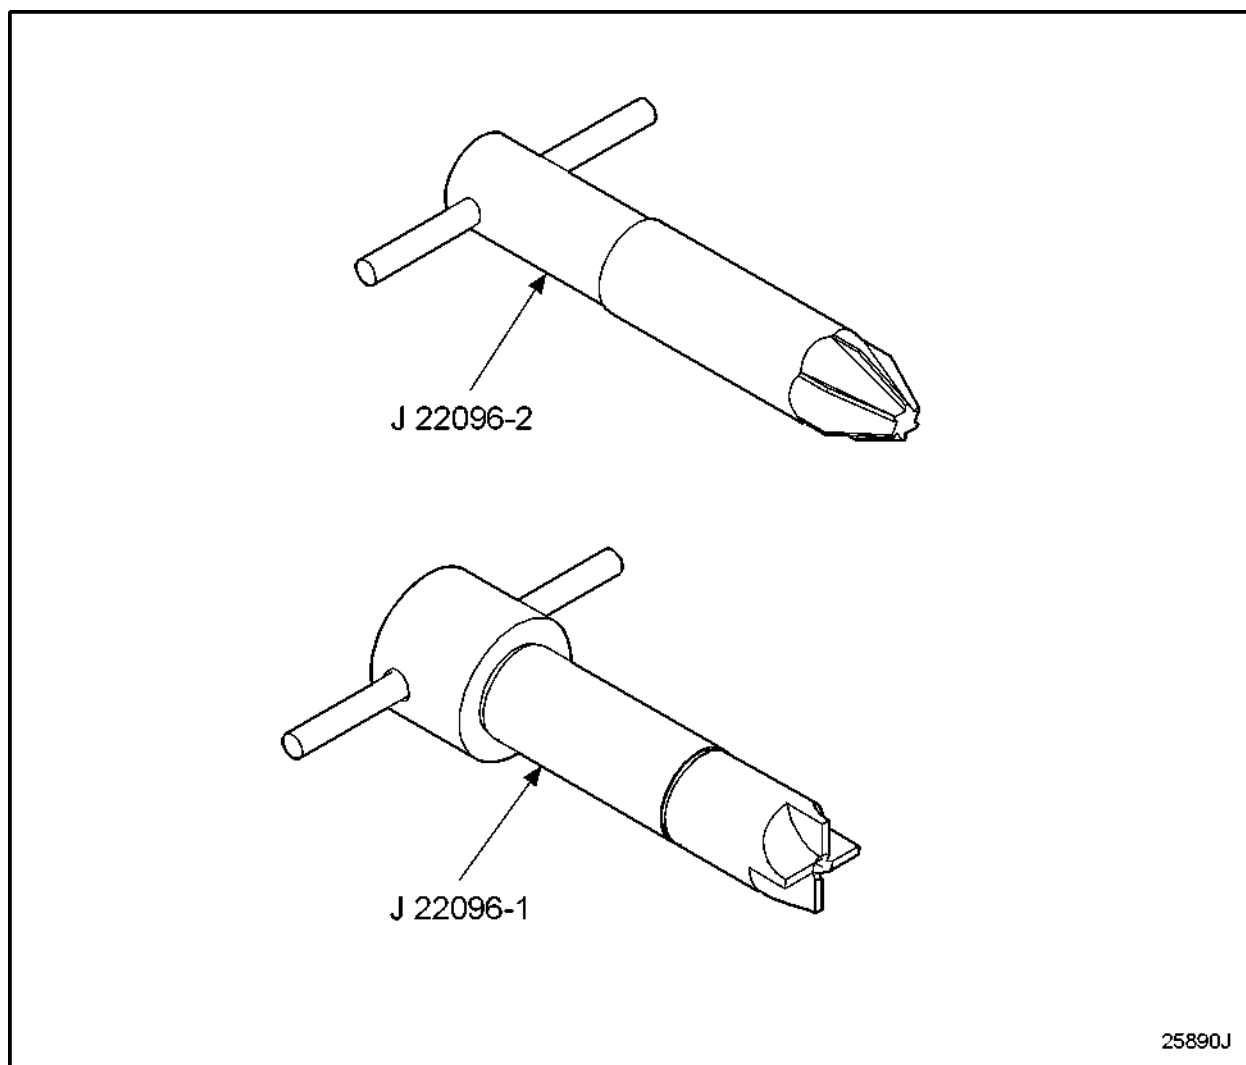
Injector Nut Carbon Remover Set, 149,J 22096-02
